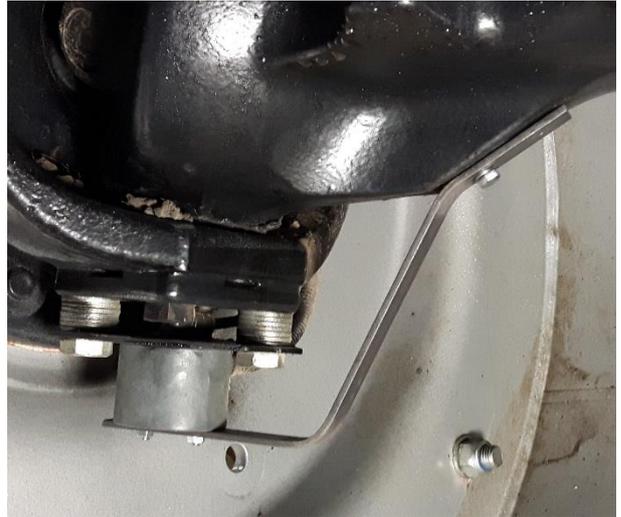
STRIP ON THE FRONT AXLE WITH ONE BOLT
